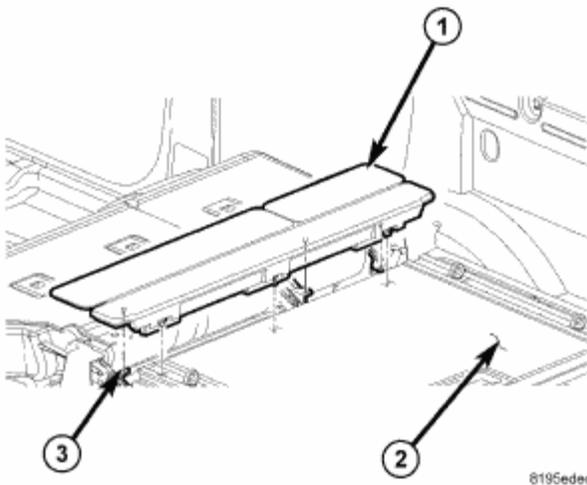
Load Floor Panel, Load Floor & Rear Seat Bracket
